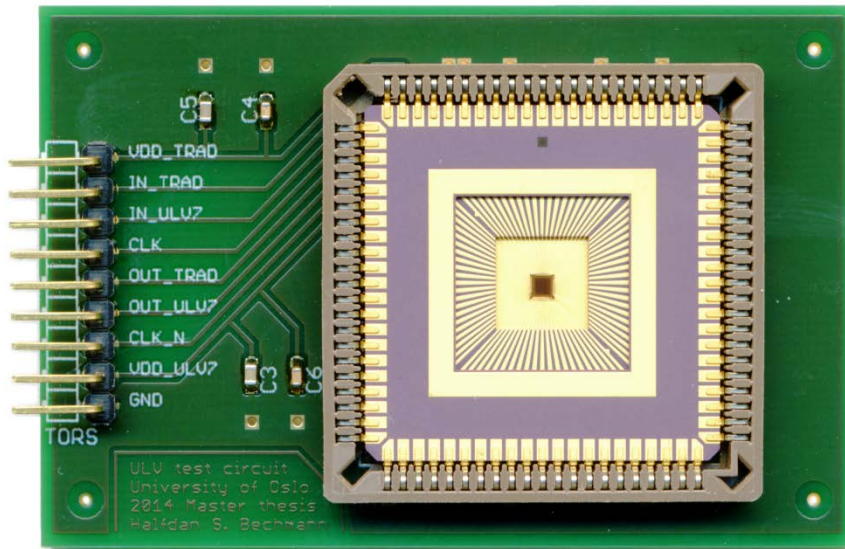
Soldered PCB with chip carrier mounted.
